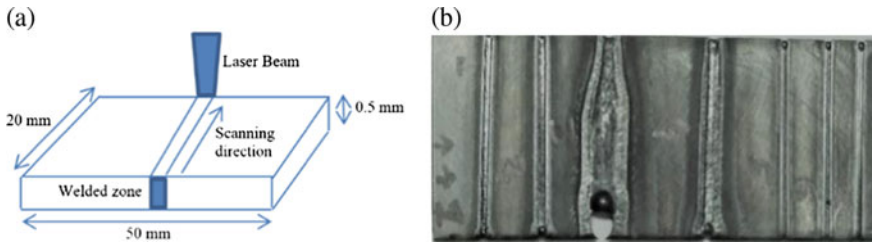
a Schematic diagram for BOP laser welding for experimental specimen, b photograph of BOP laser welding on niobium alloy sheet
